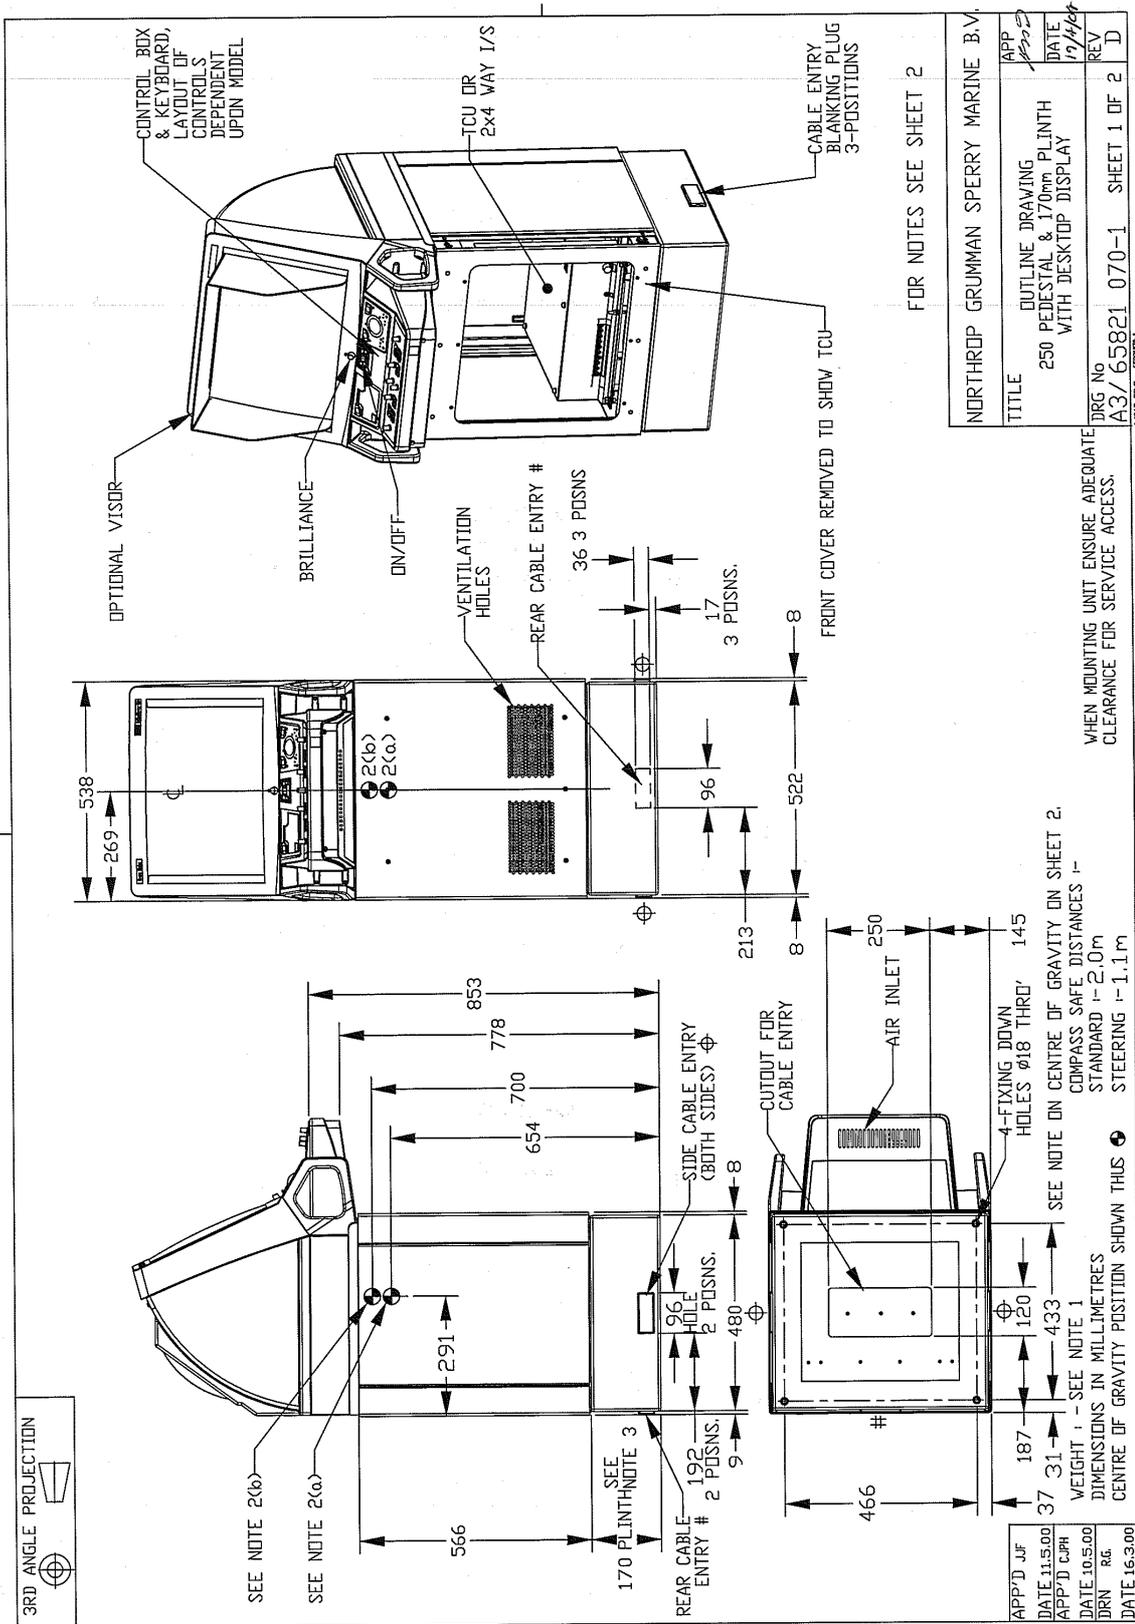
250 Display Unit (CRT with Pedestal) Outline Drawing
